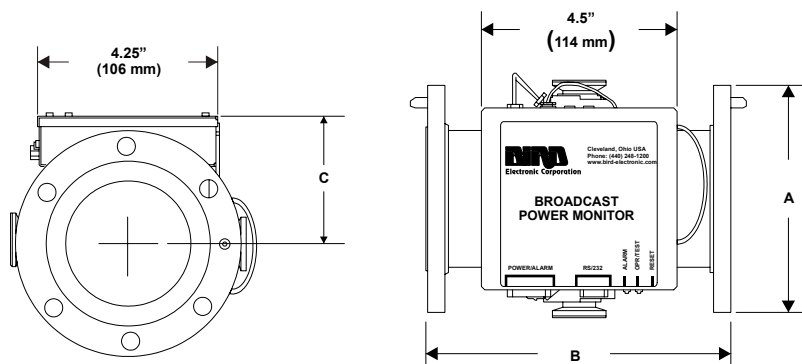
BPM-E Dimensions, Flanged and Unflanged Models
